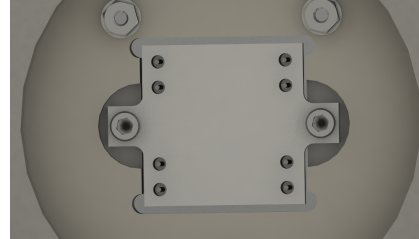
Hamamatsu PCB inside its space holder at the downside of the PEEK disk.
